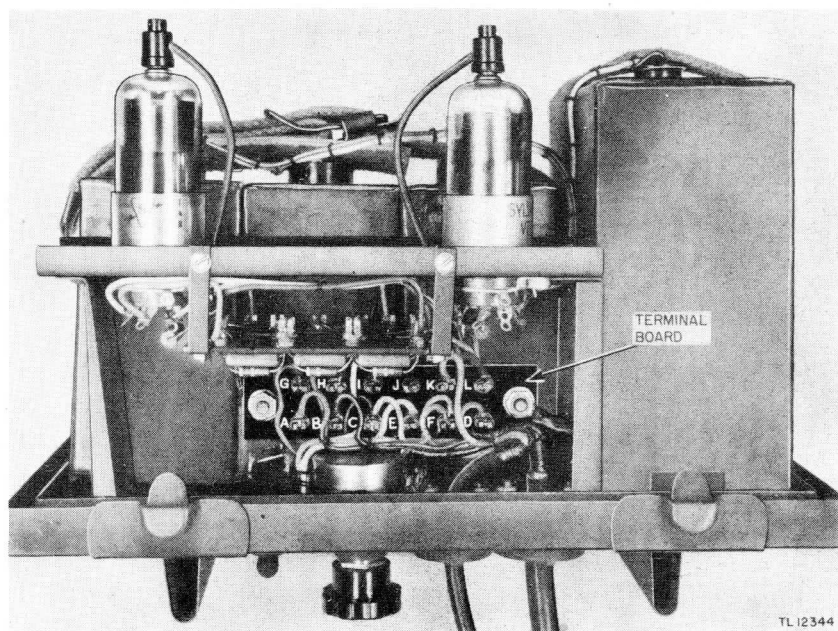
Amplifier Assembly AM-32/PRS-1 with cover removed, terminal board.
